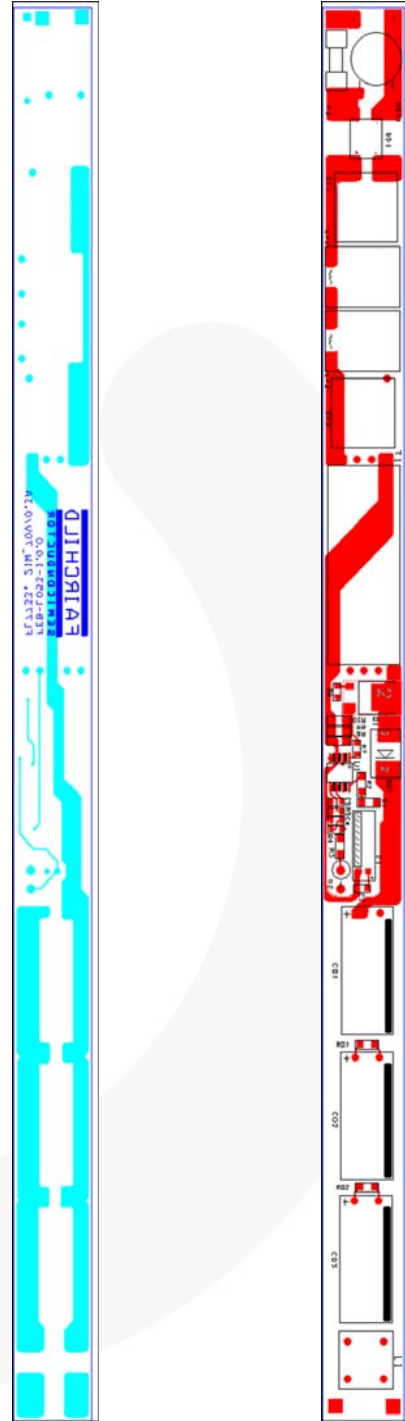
PCB Pattern Top / Bottom of Evaluation Board
